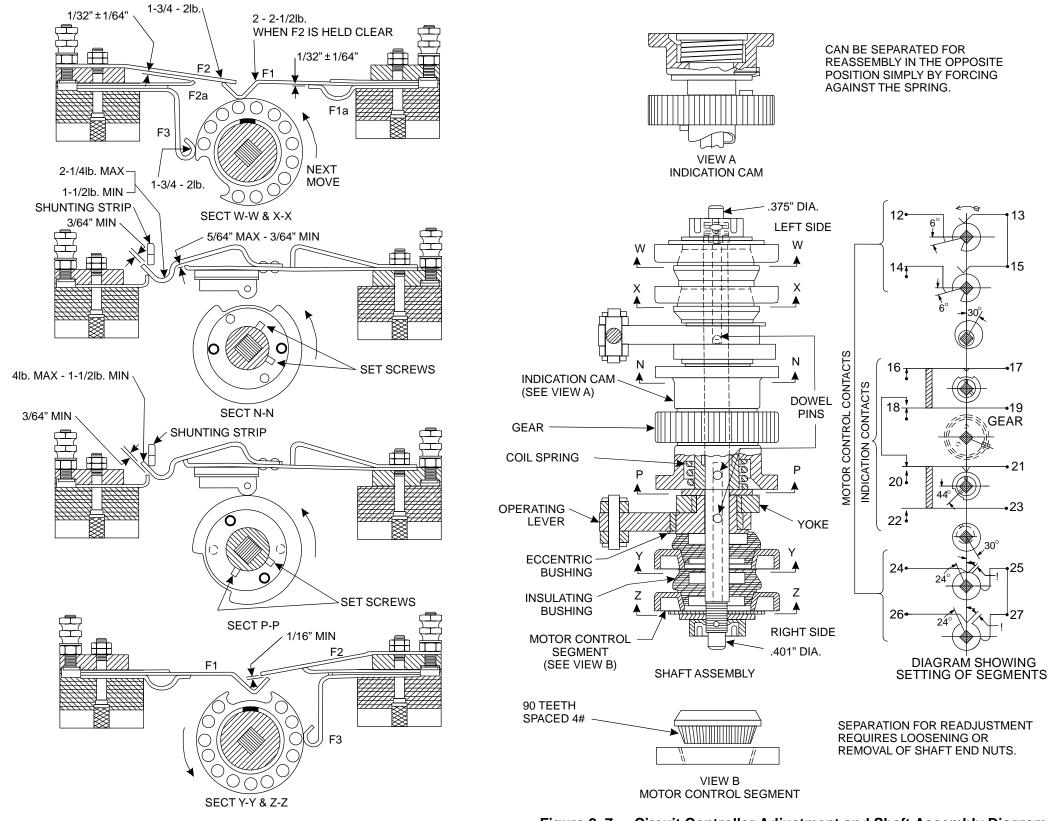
Circuit Controller Adjustment and Shaft Assembly Diagram
